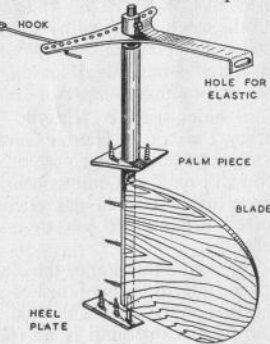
QUADRANT & RUDDER ASSEMBLY.
